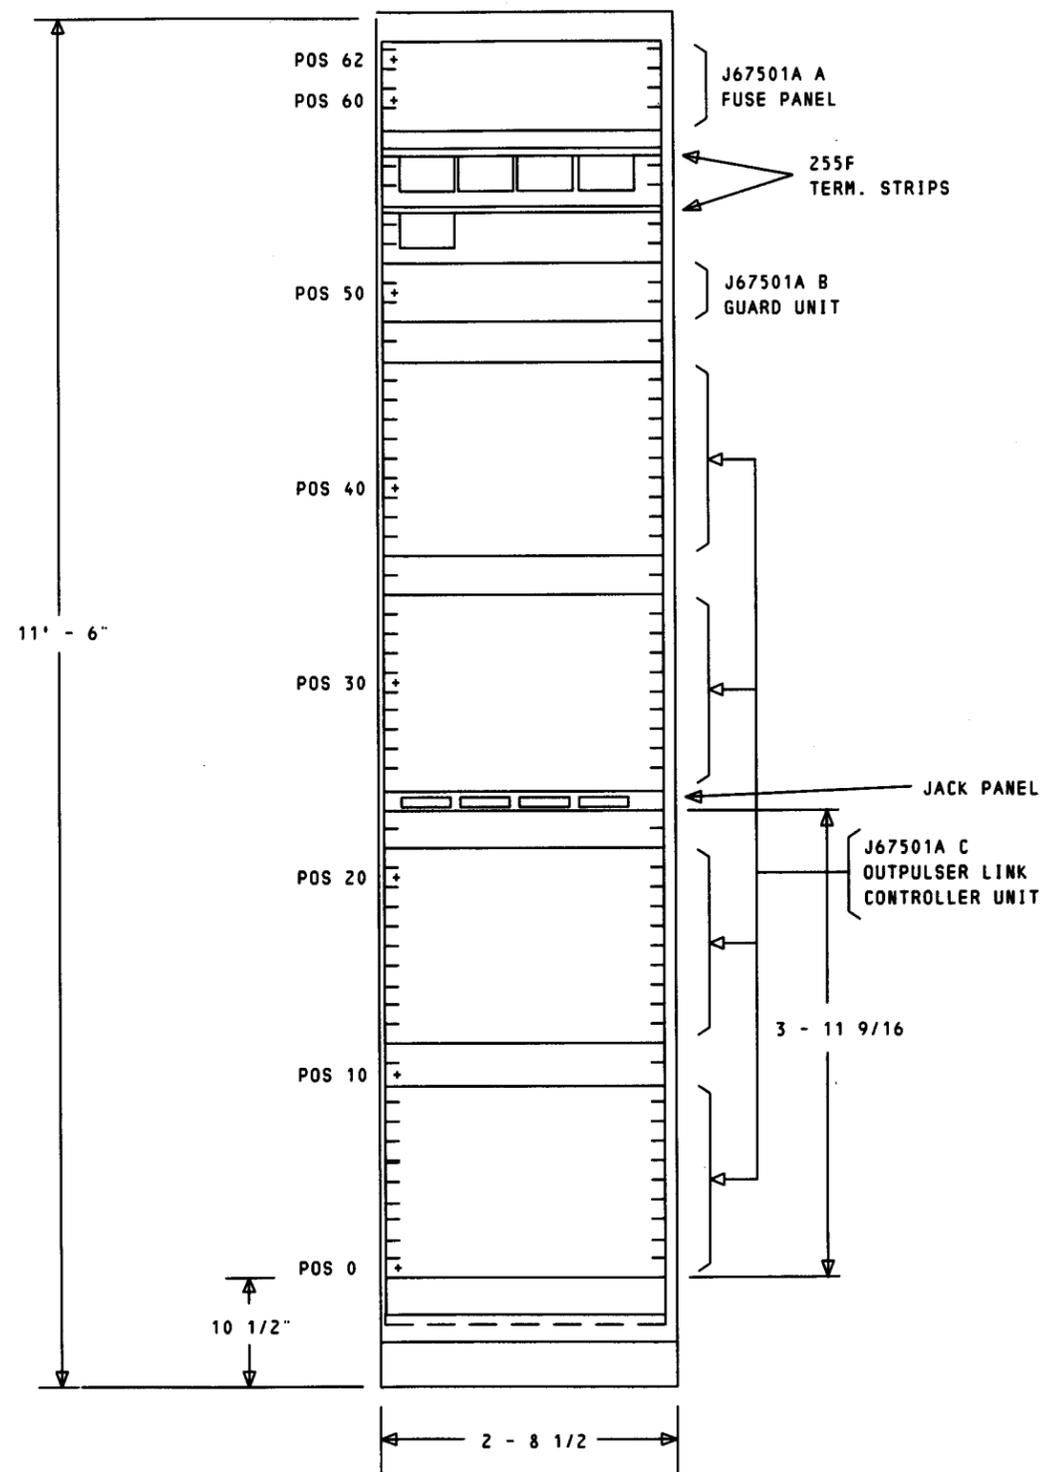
CCIS Printed Wiring Board Plug-In Trunk Frame
